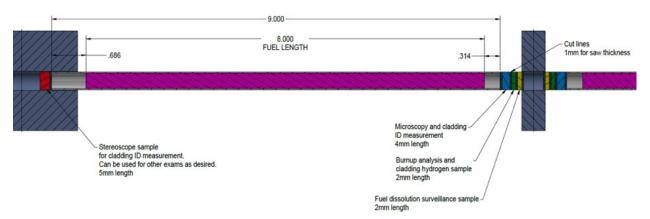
Draft sectioning plan to extract a segment for future in-pile experiment.
